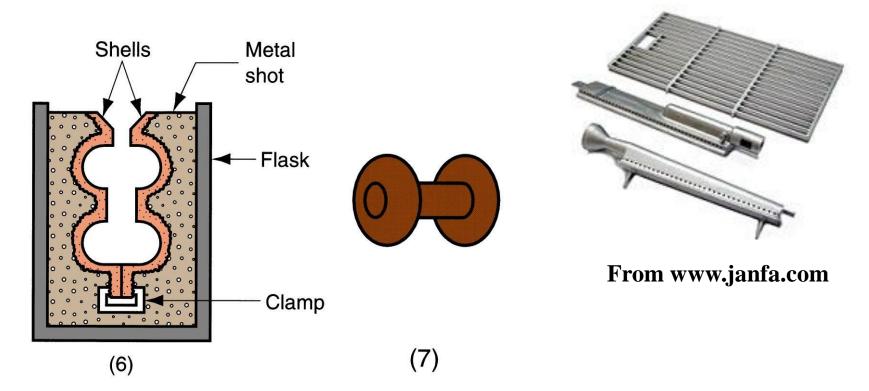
Steps in shell-molding: (6) two halves of the shell mold are assembled, supported by sand or metal shot in a box, and pouring is accomplished; (7) the finished casting with sprue removed.
